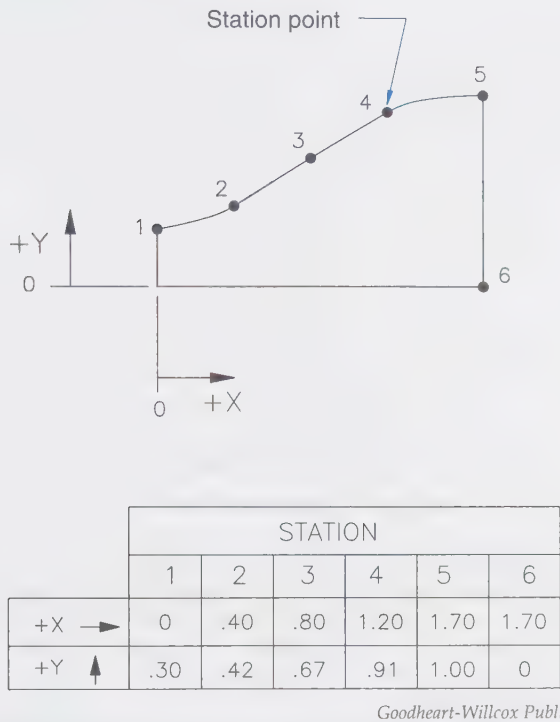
Station points may be used when outline dimensions are shown in a table. Dimensions in a table are known as tabulated dimensions.
